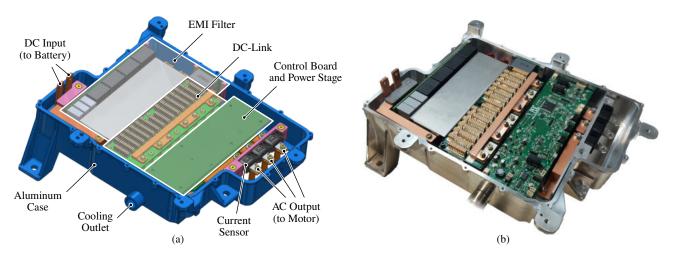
(a) 3D design view of the realized 800 V 550 kVA EV traction inverter and (b) prototype view. The system consists of the power semiconductor stage (with control board and liquid-cooled heatsink), the DC-link capacitor assembly and a DC-side EMI filter enclosed in a waterproof IP 67 aluminum case [39].
